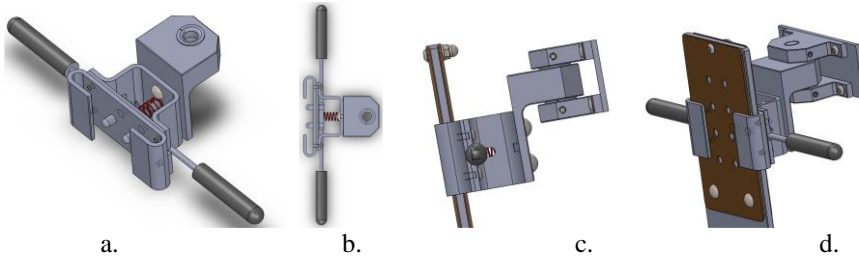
3D model of the lumbar support height adjustment mechanism: a. mechanism assembly; b. mechanism ground plan; c. mechanism hinged to the mobile part of the joint using bolts; d. mobile part connected to a plate that connects to the backrest
